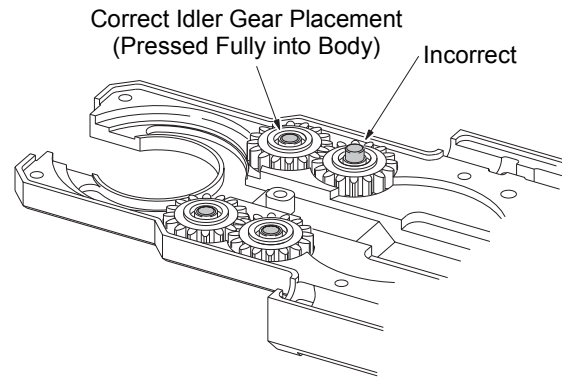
Correct Placement of Idler Gears in Micro Weld Head Housing
